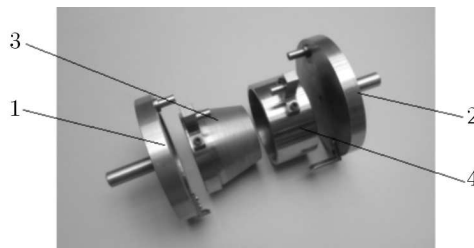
Components of the investigated sleeve-shaft neck friction joint: 1 – lower pressure plate grip of the model, 2 – upper grip of the model, 3 – shaft neck, 4 – sleeve
